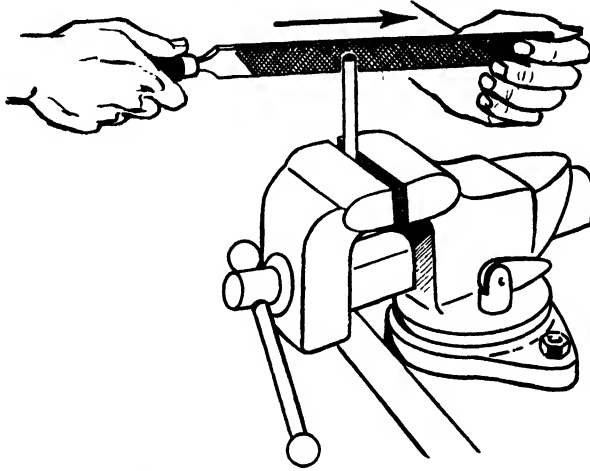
To enable the die to start easily, taper the end of the rod slightly by filing grinding, or hammering. Do not make the taper too blunt.
